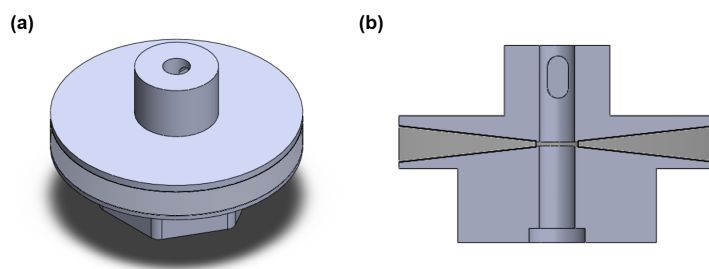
CAD model of SEE version 3 (large). (a) Isometric view. (b) Section view.
